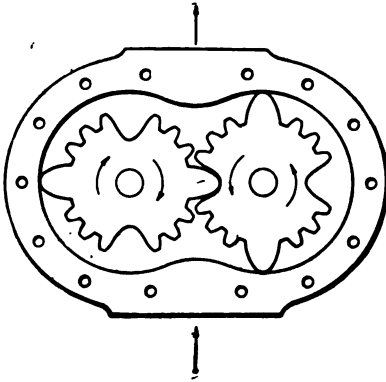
Operation of Gear Type of Water-Circulating Pump.
